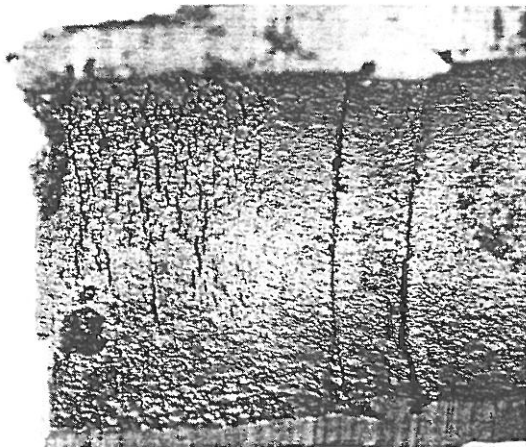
Internal circumferential cracking in a tube connector attached to an economizer inlet header
